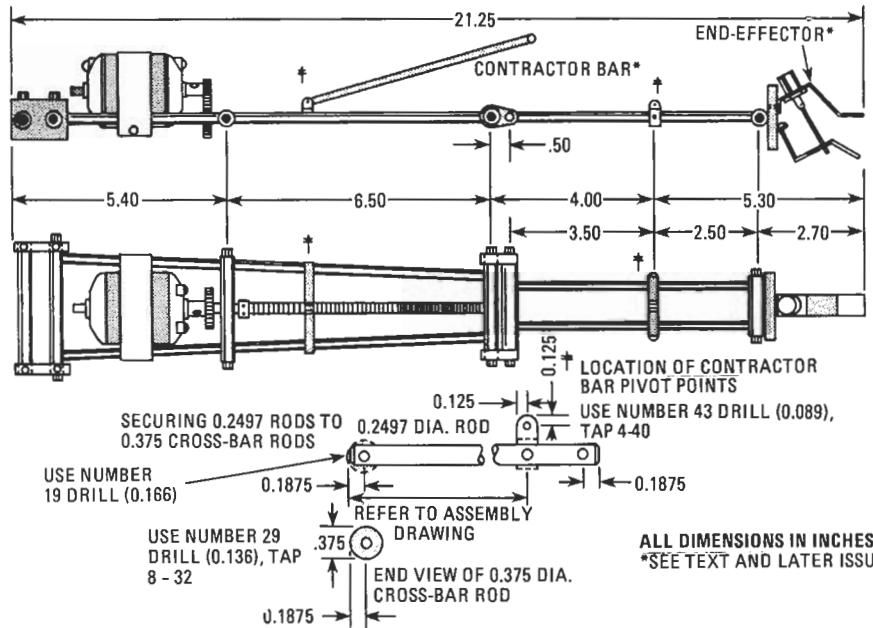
SIDE AND TOP views of the assembled manipulator. End-effector and contractor-bar will be covered in the next installment.
